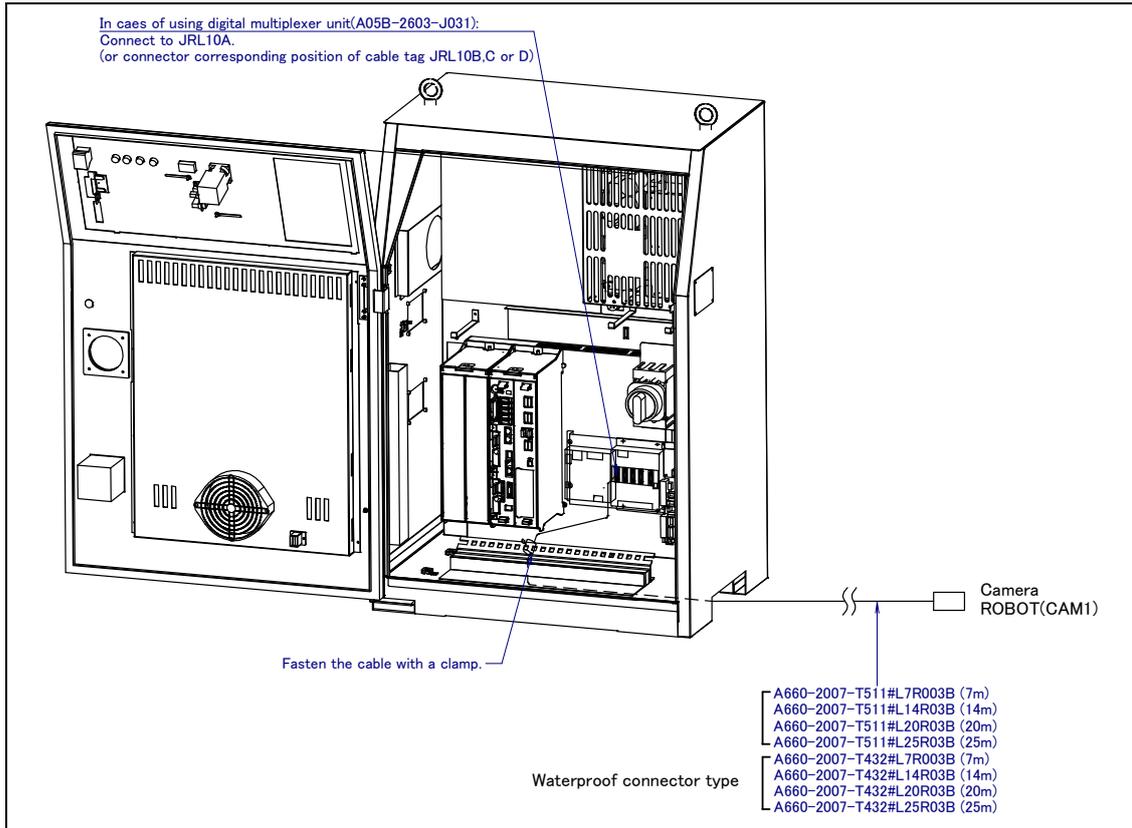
(b) Camera connection cable (digital camera connection cable, digital camera multiplexer)
